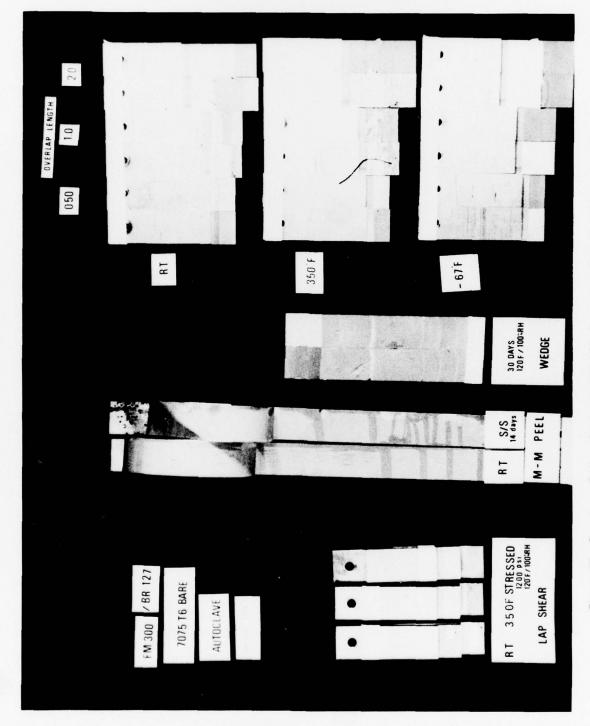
Specimen Failure Surfaces—FM 300, Optimized FPL Etch, Autoclave Bonds
